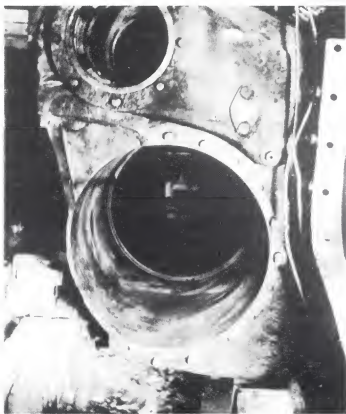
Another view of the C36 class cylinder failure. Note the use of firebricks to build a small furnace under the cylinder prior to welding.
